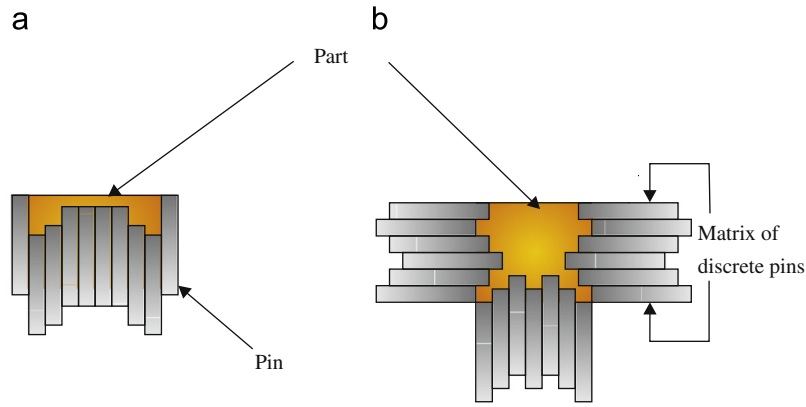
Cross-sectional view of the open reconfigurable mold tool: (a) 1-matrix setup and (b) 5-matrix setup.
